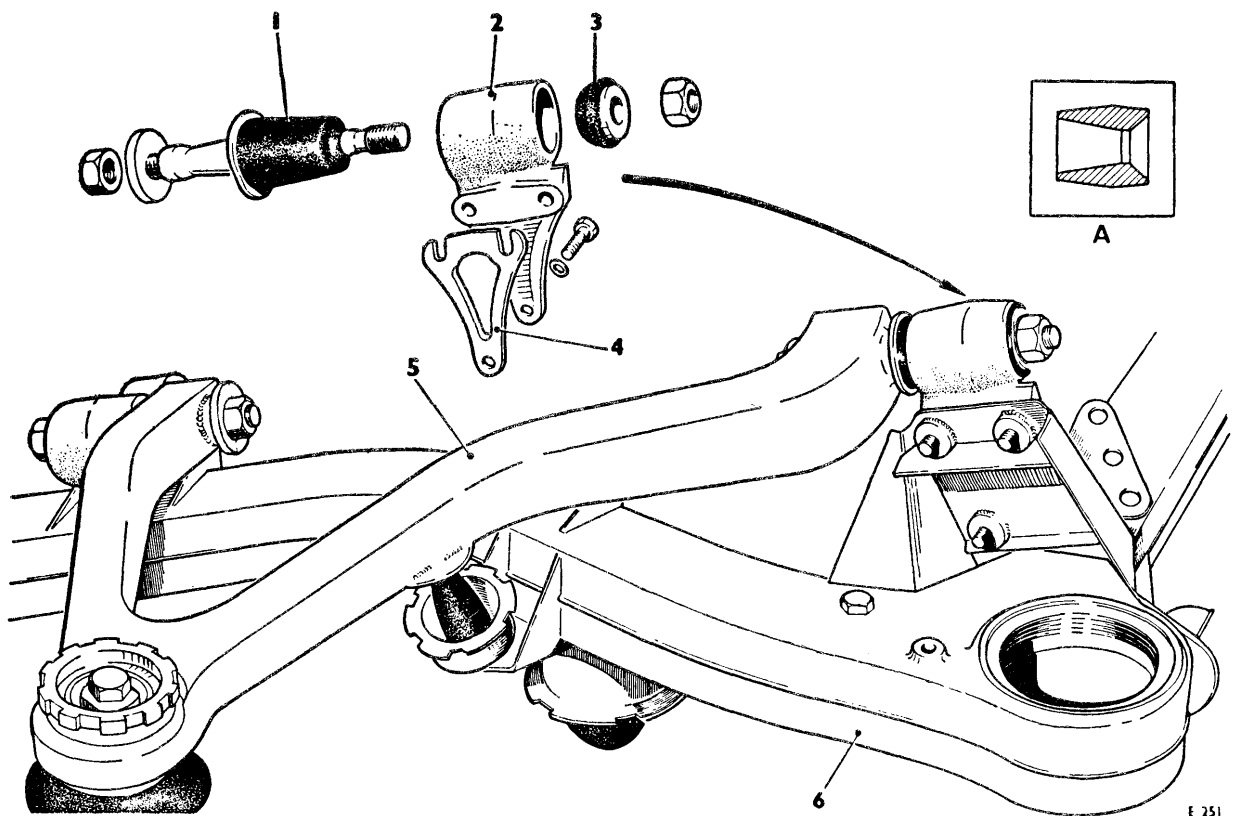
UPPER TRIANGLE LEVERS MOUNTING POINTS
